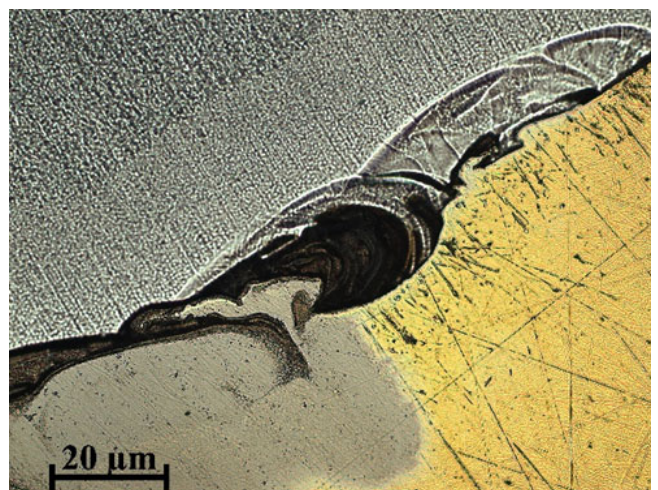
Discontinuities in the weld. Sample before etching. Light microscopy
